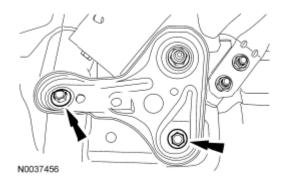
Locating Front Subframe Nut Courtesy of FORD MOTOR CO.
